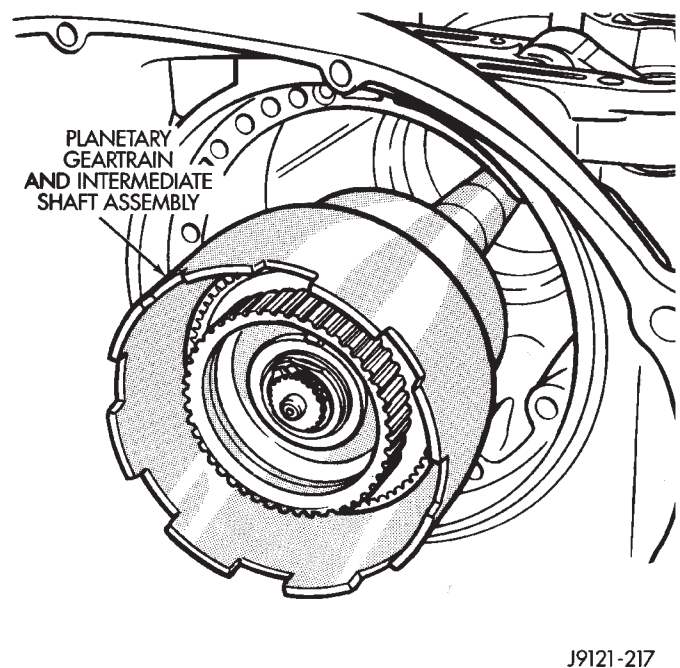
Removing Planetary Geartrain And Intermediate Shaft Assembly
